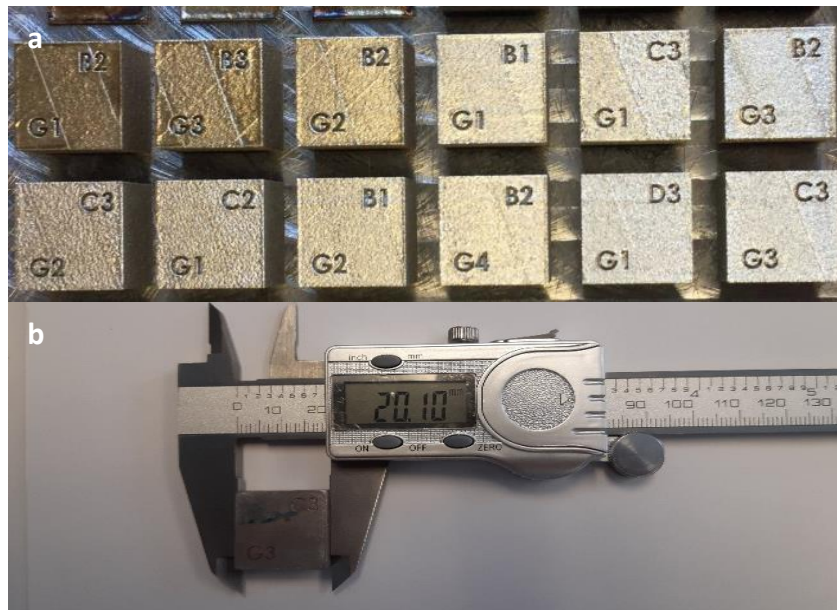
a) Sample Coupons after printing b) Dimension of sample coupon
